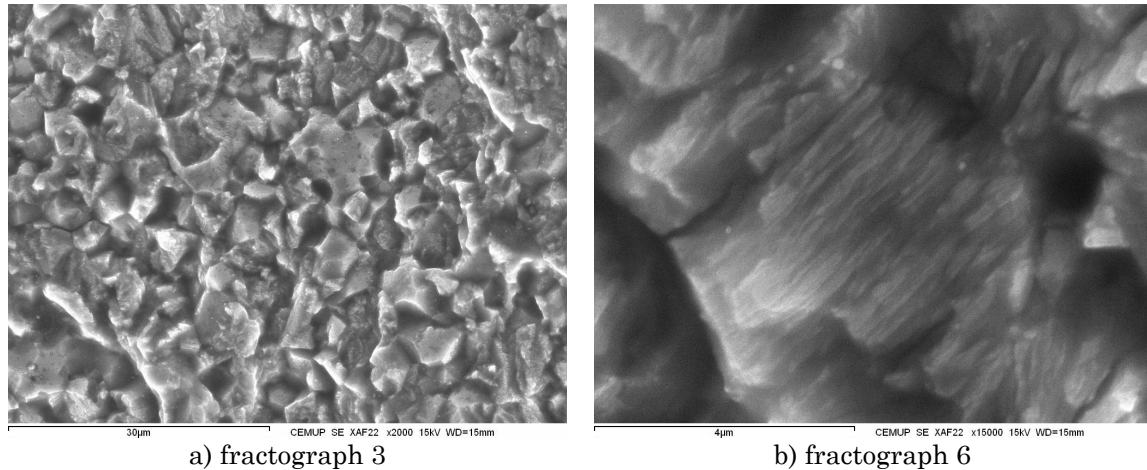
Fatigue crack structure and striations, AA6082-T6 FS welded specimen.
